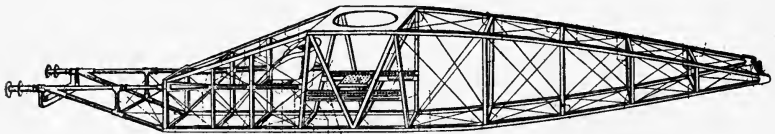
Wooden Fuselage with tubular Engine Bearers.
